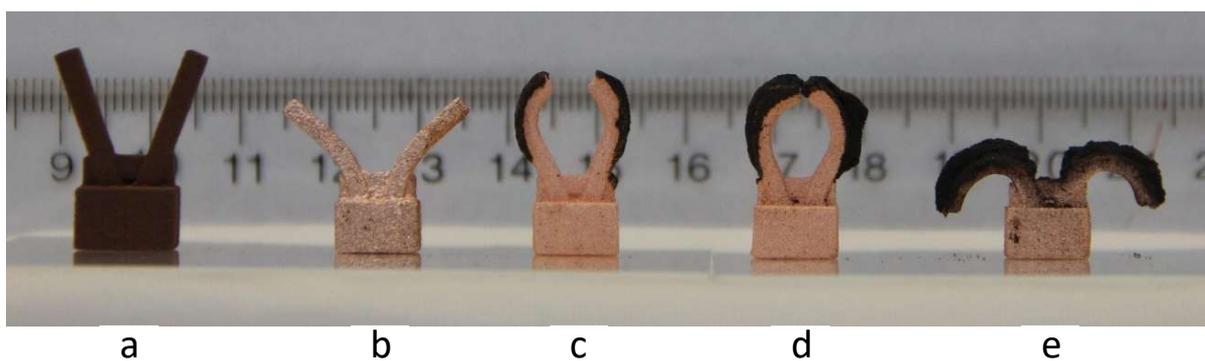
Copper parts with shape-inducing-stimulus coating showing a possibility of controlled amount of positive deformation can be induced in a 3D printed part during sintering. (a) green part (b) sintered part (c) sintered part with coating (less amount) (d) optimum amount of coating on the part to allow closing the loop and (e) coating applied on top surface of overhang areas. (Note: 1 div = 1 mm on the ruler)
